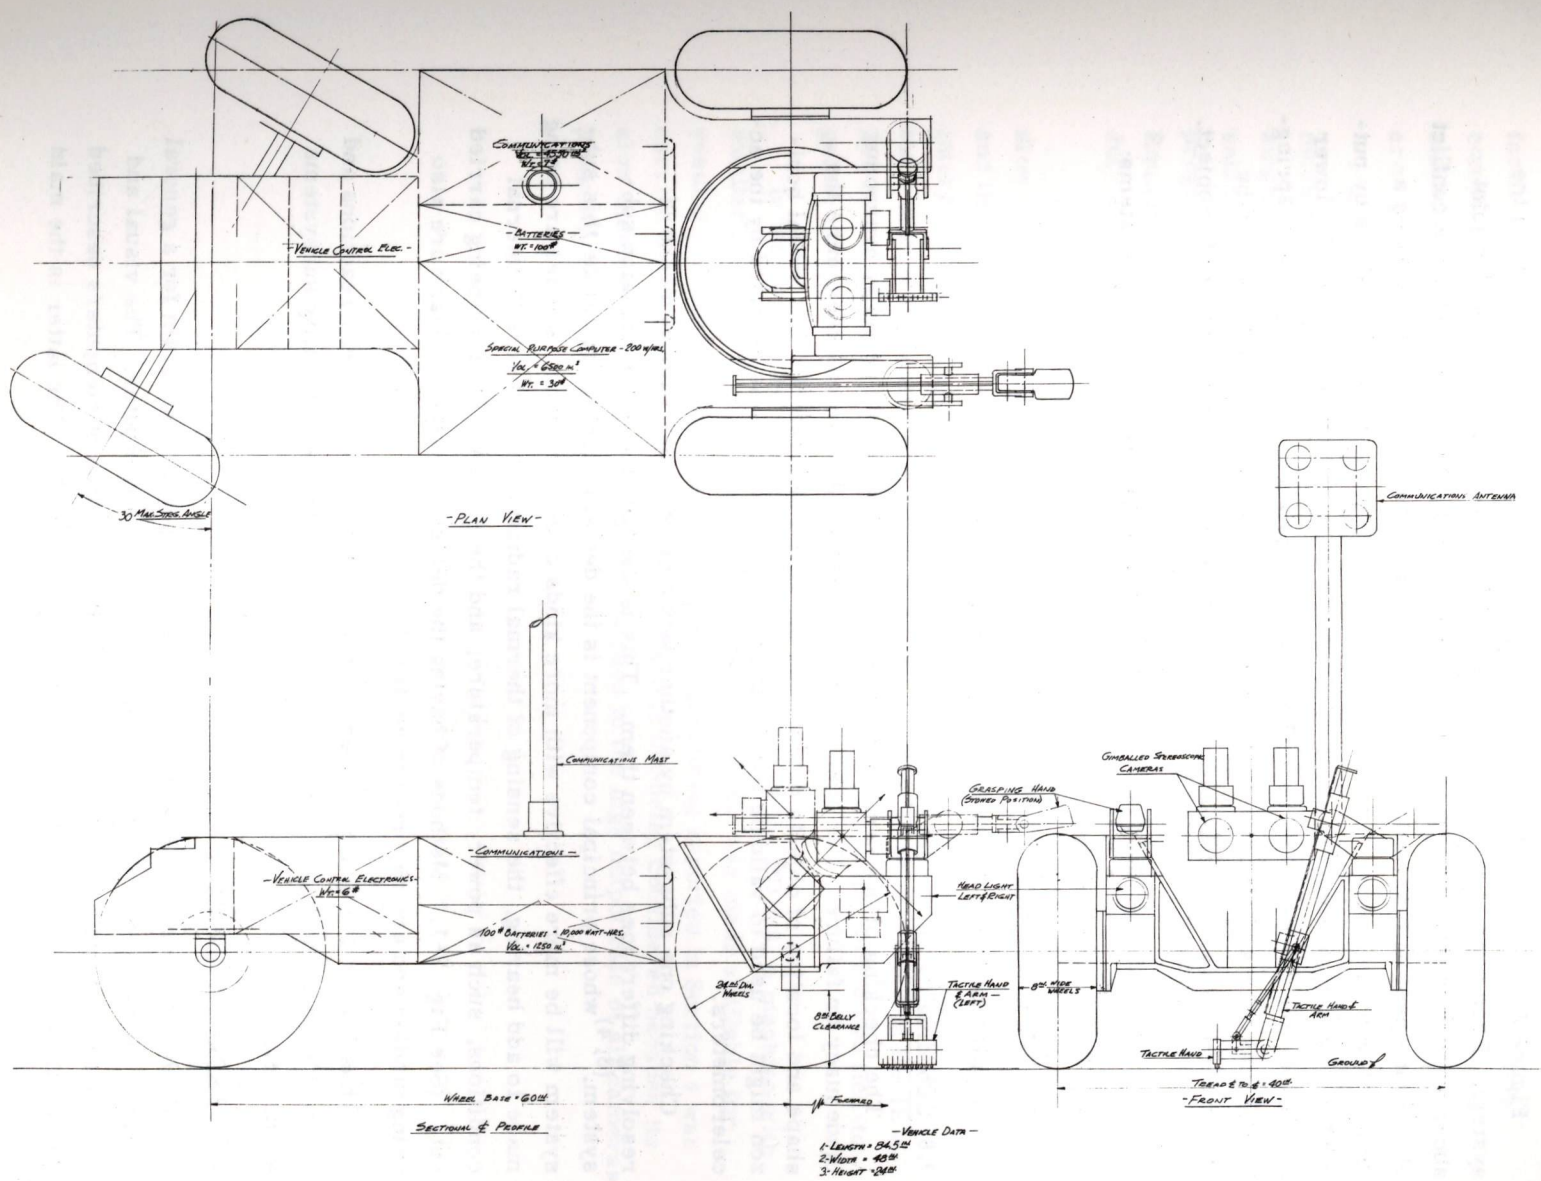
Stereo pair of cameras mounted on front axle.
